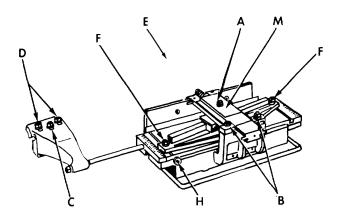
View of Plain Bearing Taper Attachments with guards removed.
